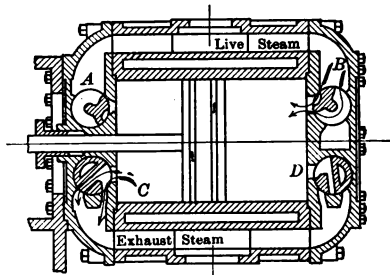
SECTION OF ATLAS CYLINDER SHOWING ROCKING VALVES
